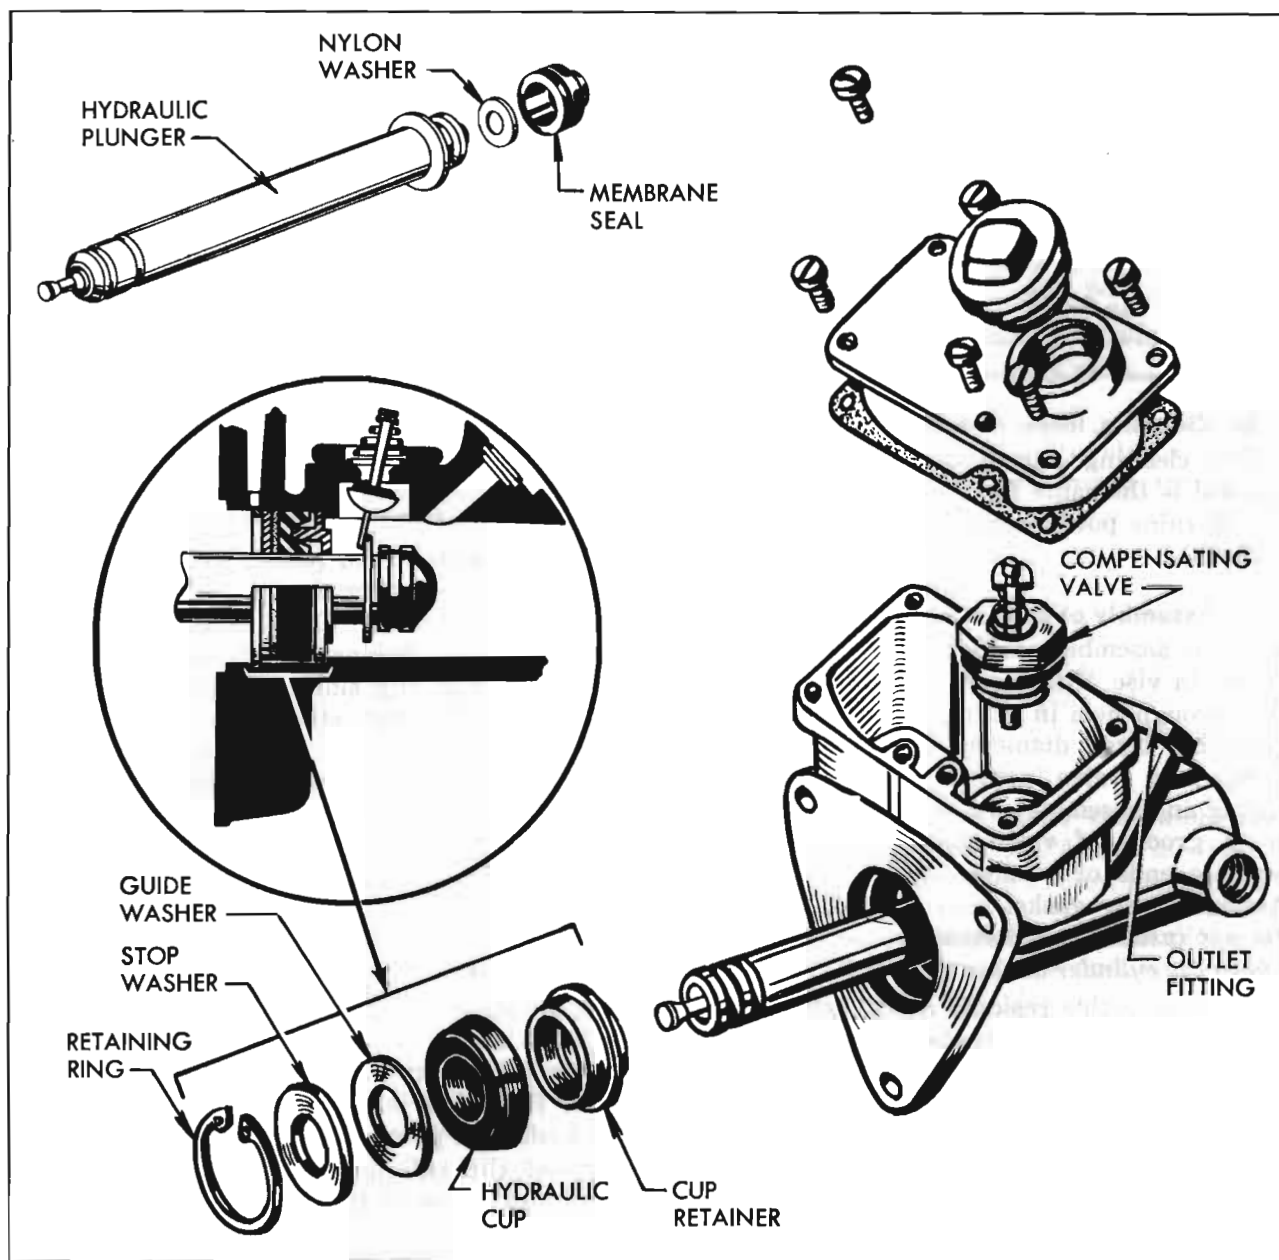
Hydraulic Cylinder Assembly—Exploded
